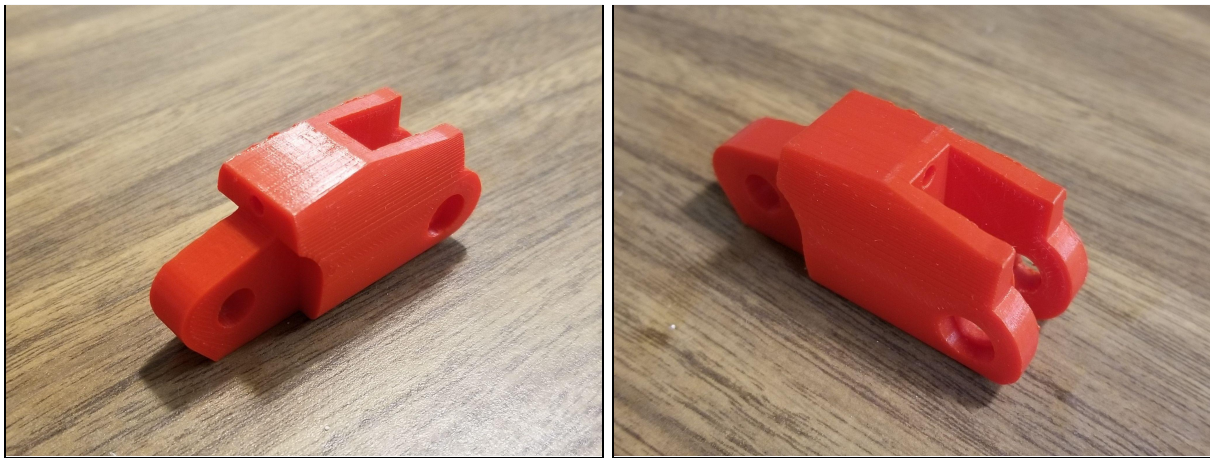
3D printed phalange extension component. This prototype has both a male and female end to allow it to join with existing parts without adjustment of those components.
